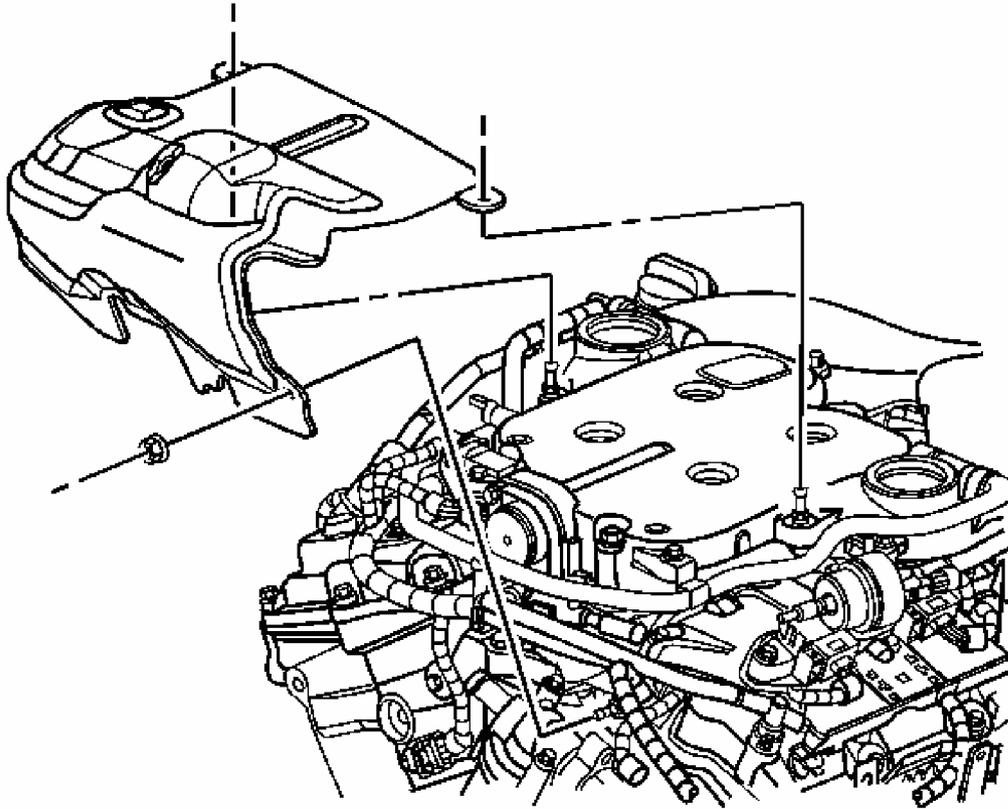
Removing & Installing Rear Upper Intake Manifold Cover
